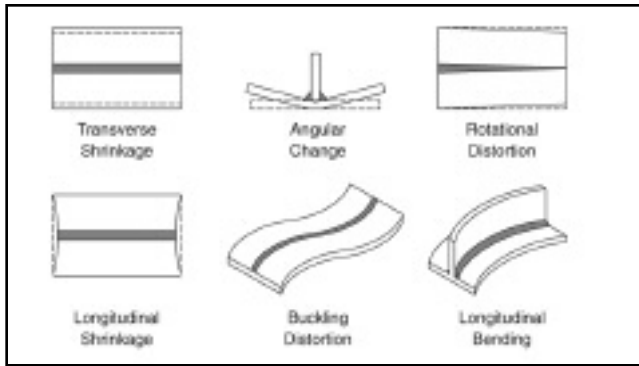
Types of welding distortion (Ref. 1).
